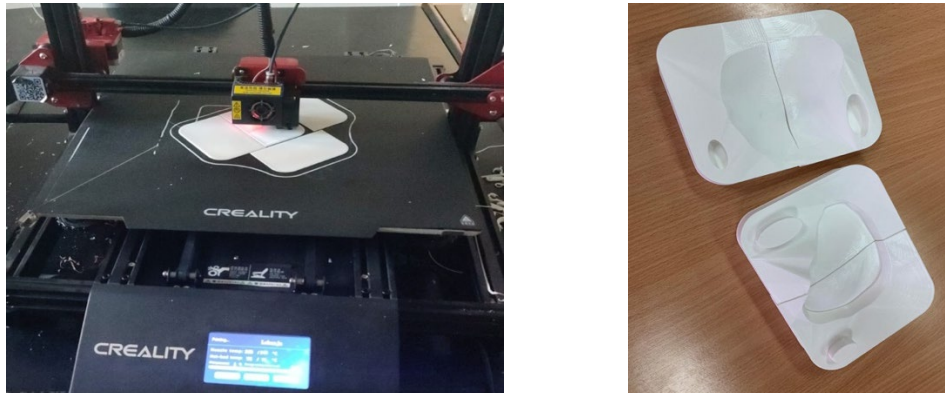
3D mold printing process (left), final four-piece mold product (right)
